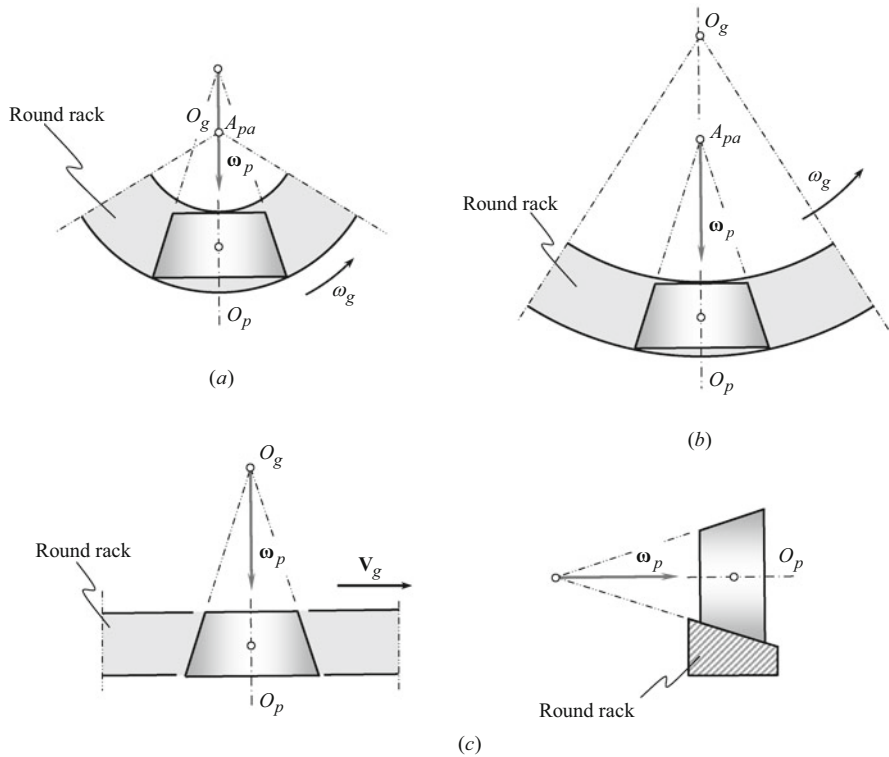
Examples of gear generic surfaces of rack-type crown gear pairs that feature intersecting axes of rotation of the gear and the pinion and with straight-line axial profiles
